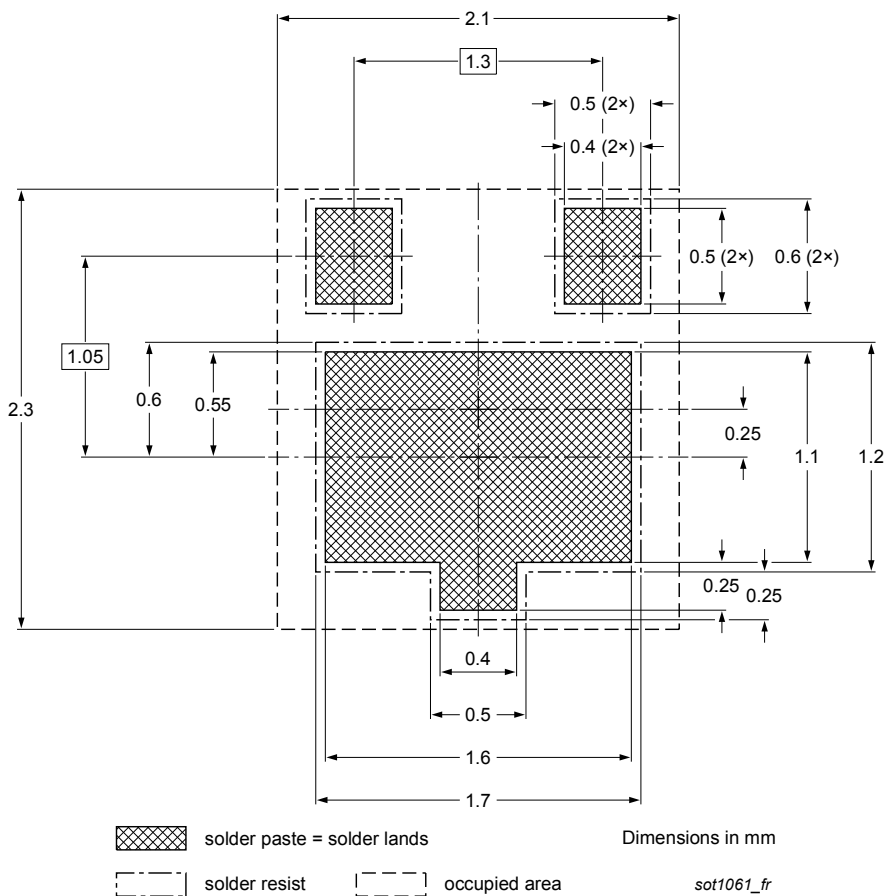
Reflow soldering footprint for DFN2020-3 (SOT1061)
